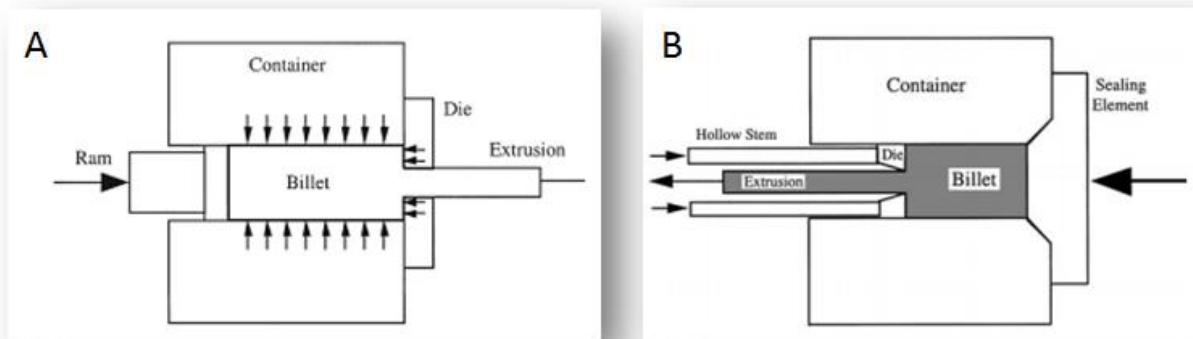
Schematic showing (A) direct extrusion and (B) indirect extrusion. The compressive forces on the billet are shown in the direct extrusion schematic. The stem being pushed into the container as the extrusion gets pushed out the opposite side is shown on the indirect extrusion schematic [5].
